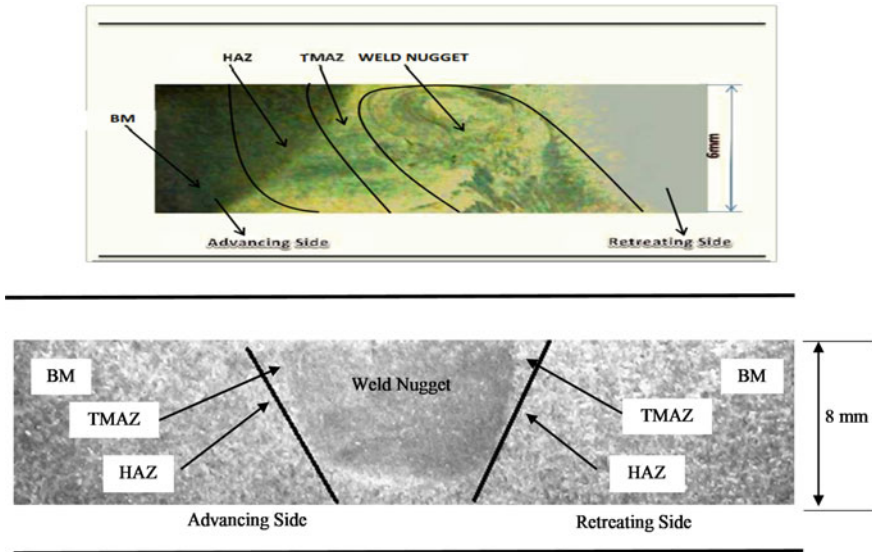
Macroscopic view at the cross section of the friction stir welded AA6061/SiC/B₄C composite illustrating typical weld zones (Weld nugget, TMAZ, HAZ) [28]
